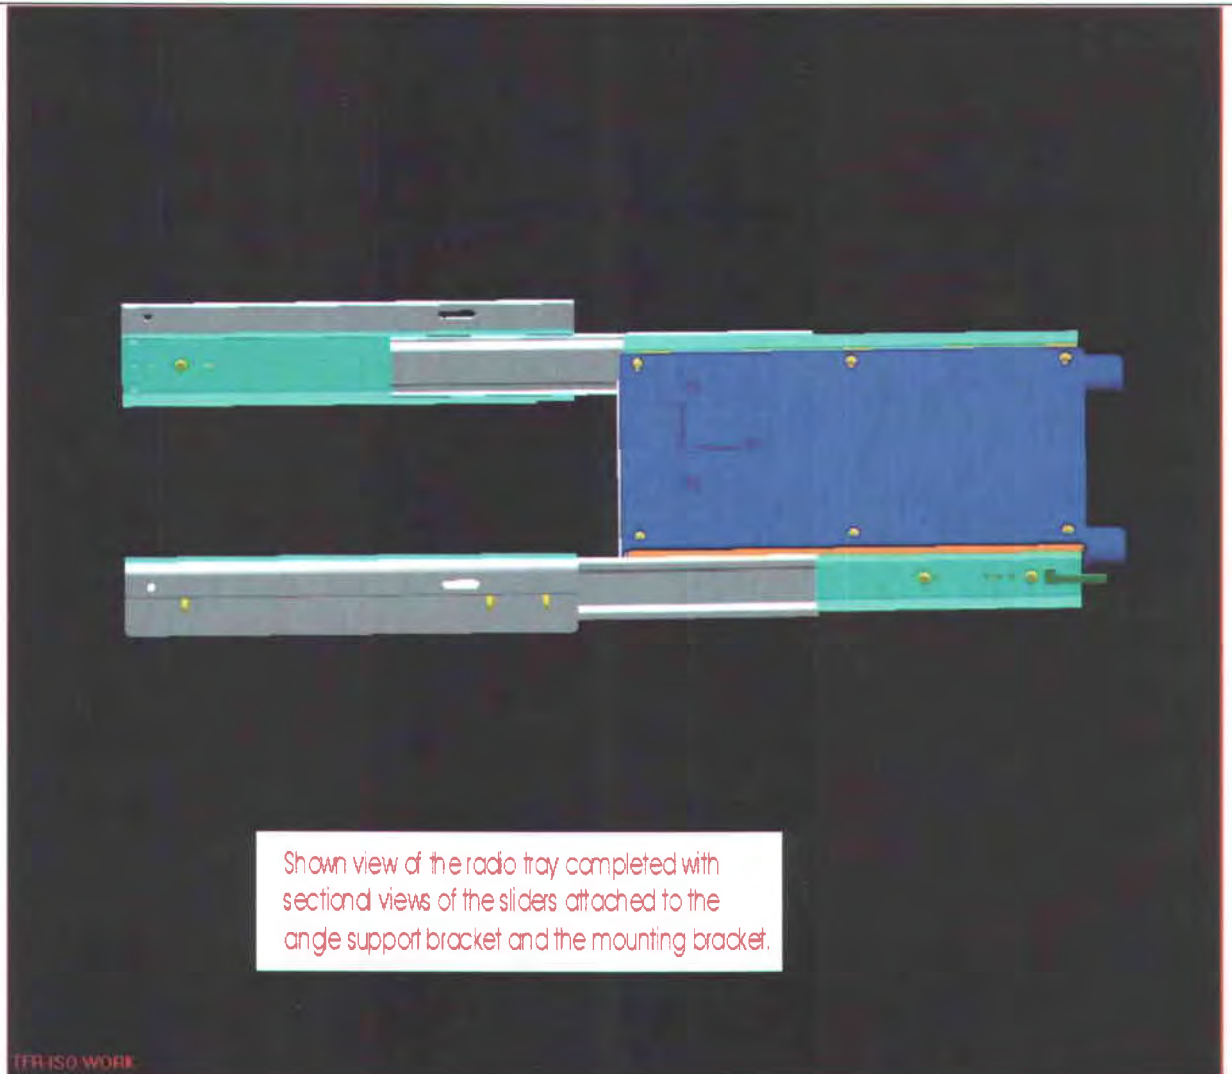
SHOWN VIEW OF COMPLETED TRAY.
